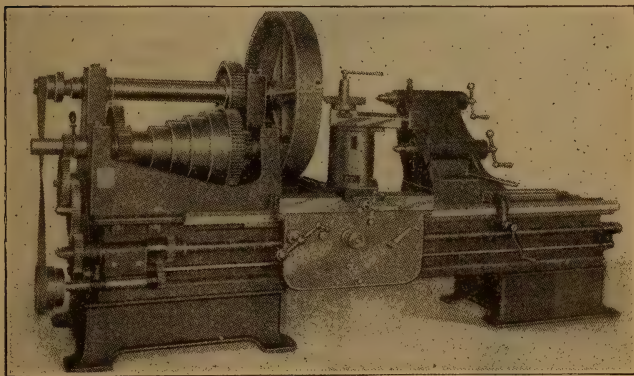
McCabe's Patented "2-in-1" Double-Spindle Lathe.
